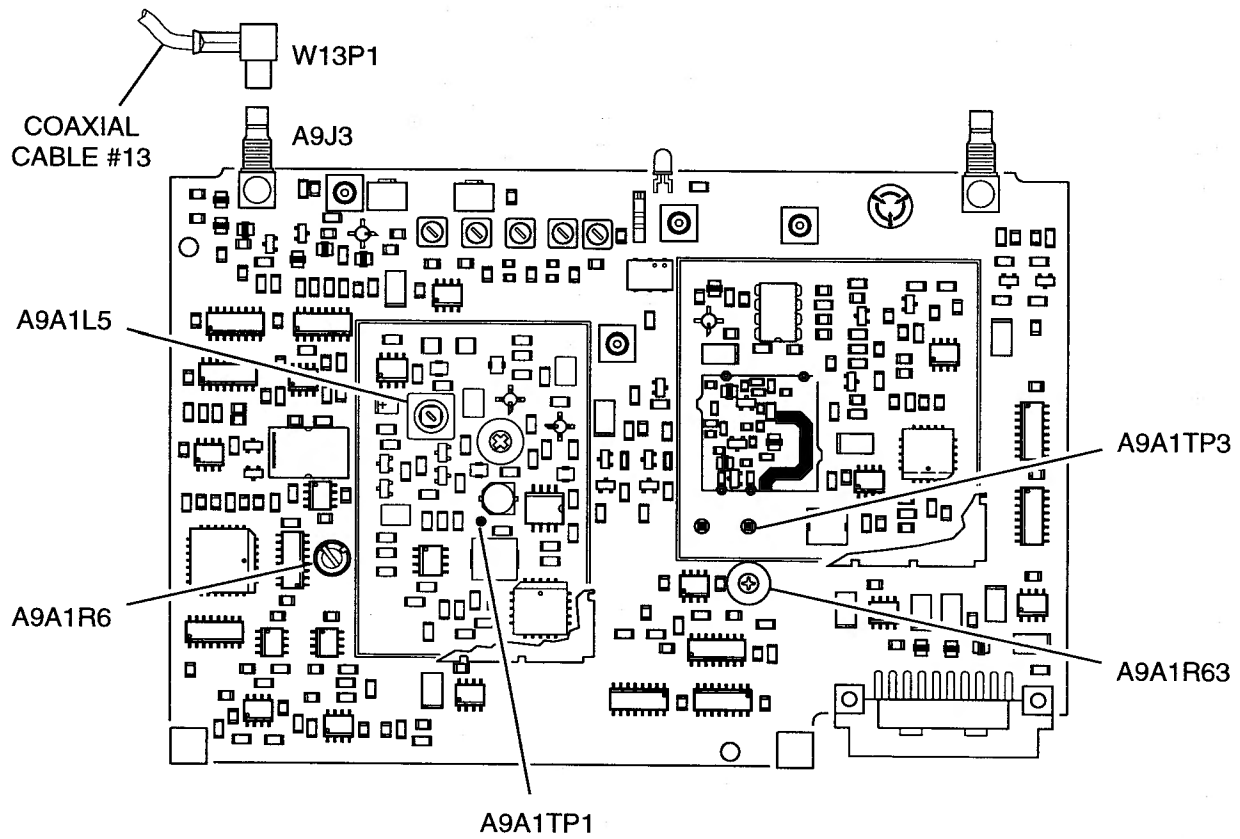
90 MHz Generator PC Board Assembly (78A1A9A1) Removal
